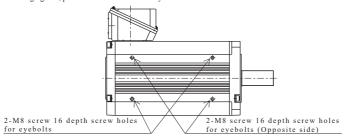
Screw hole for eyebolt. (3.7 to 7.5kW)
